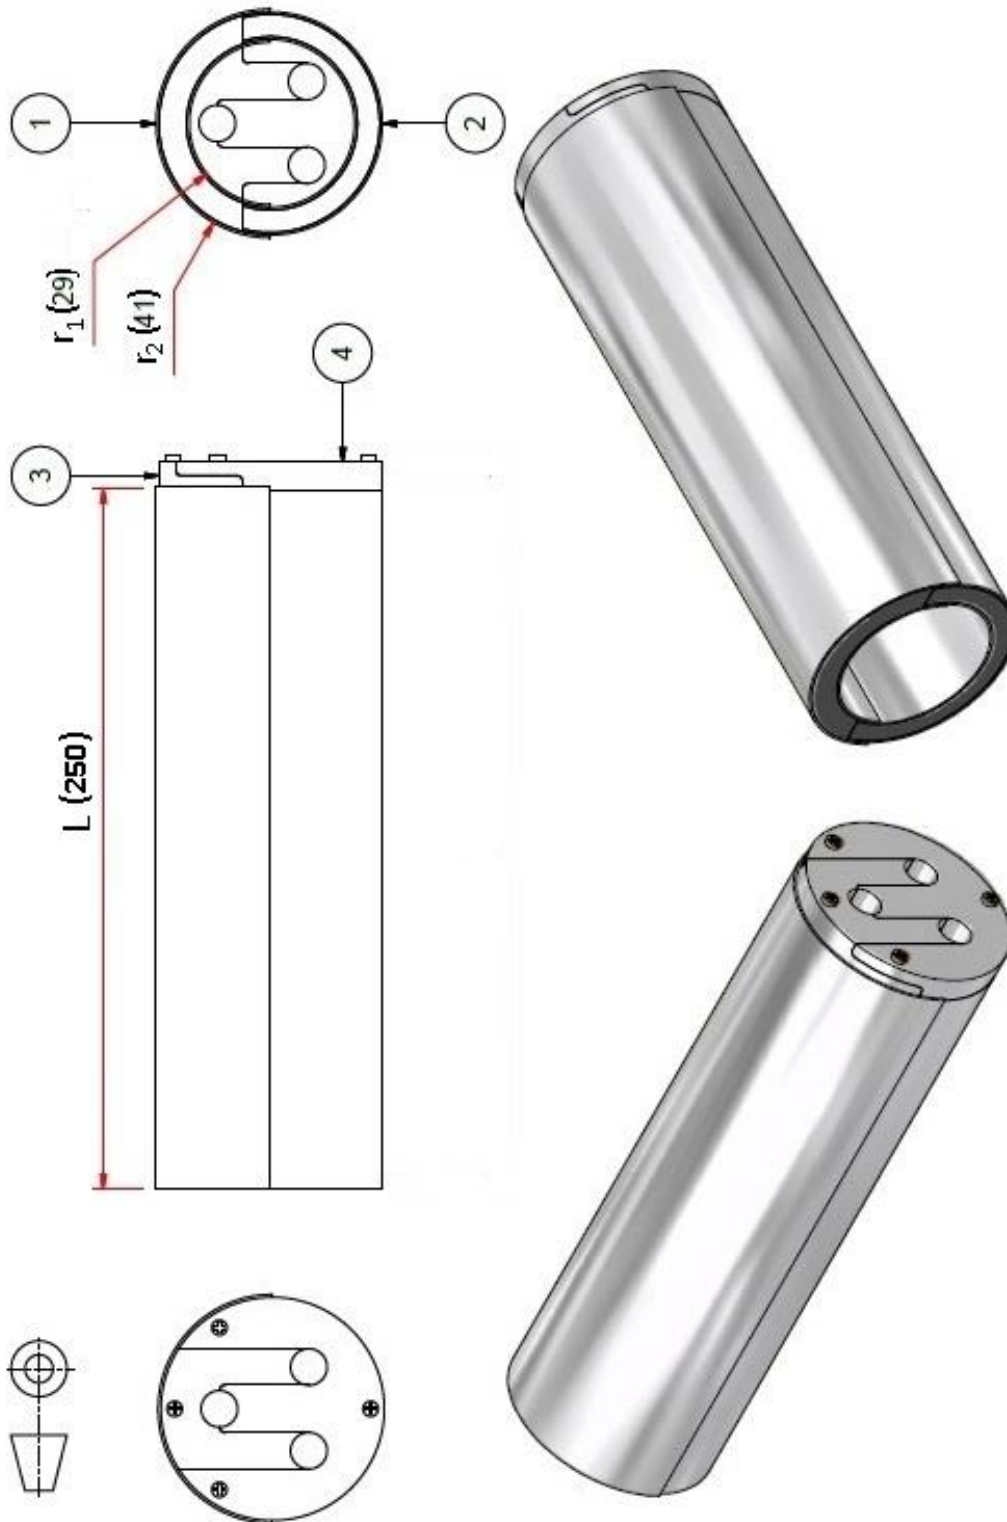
Magnetic Shield design. (1) Outer half-cylinder (2) Inner half-cylinder (3) Outer half cylinder lid (4) Inner half-cylinder lid. Layer thickness is 1 mm.
